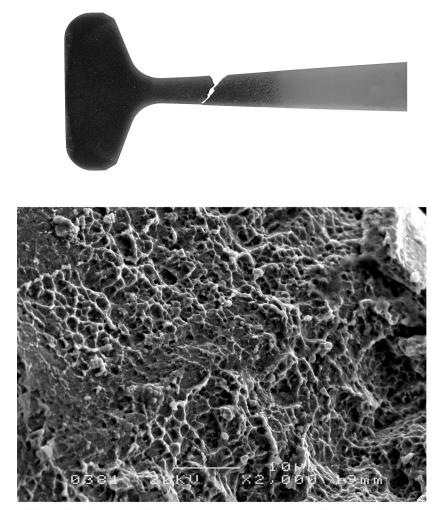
View of disk fracture showing position relative to grain size transition (top) and ductile morphology of fracture surface (bottom).
